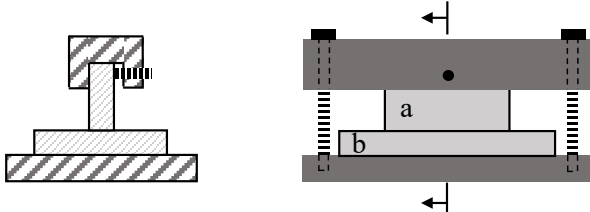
Experimental setup for the DP780 sheet welding, with bolted joints.
